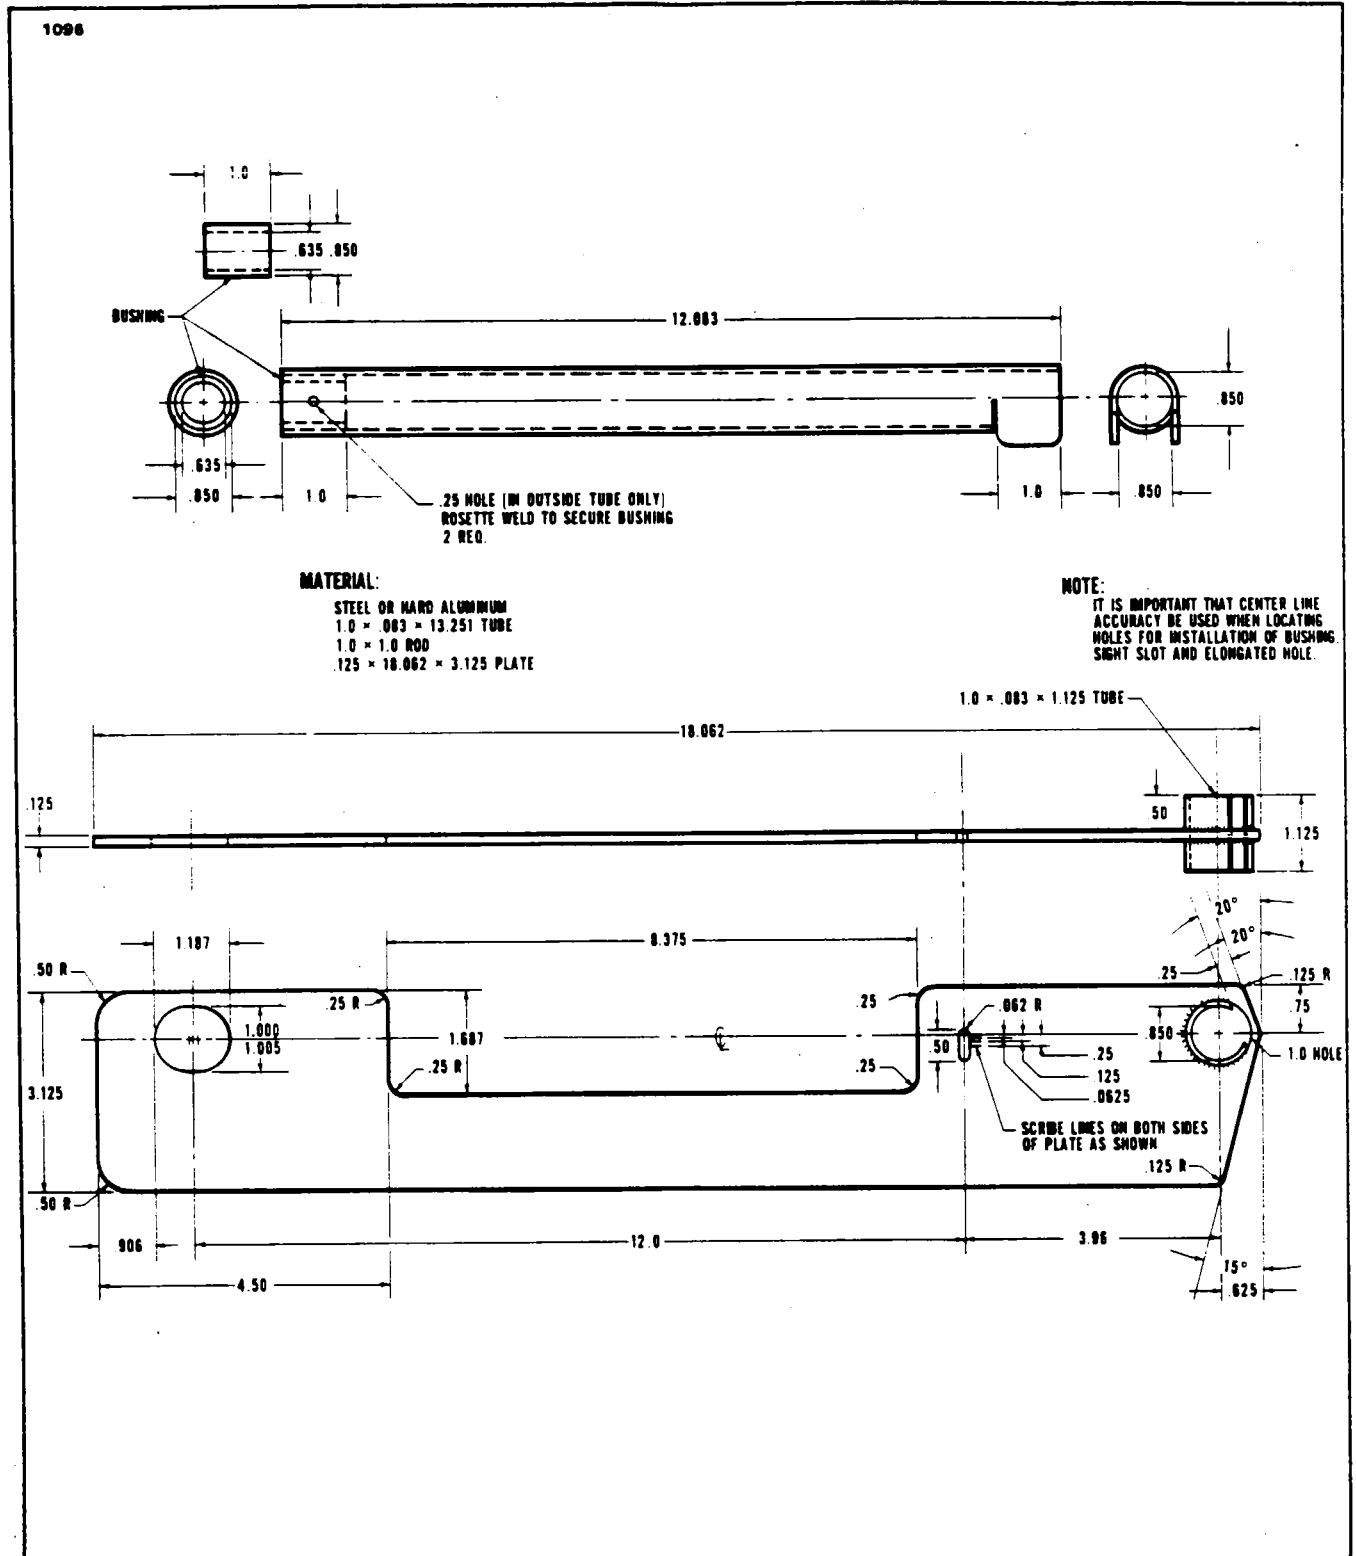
Fabricated Tool, Checking Main Gear Side Brace Link Travel
